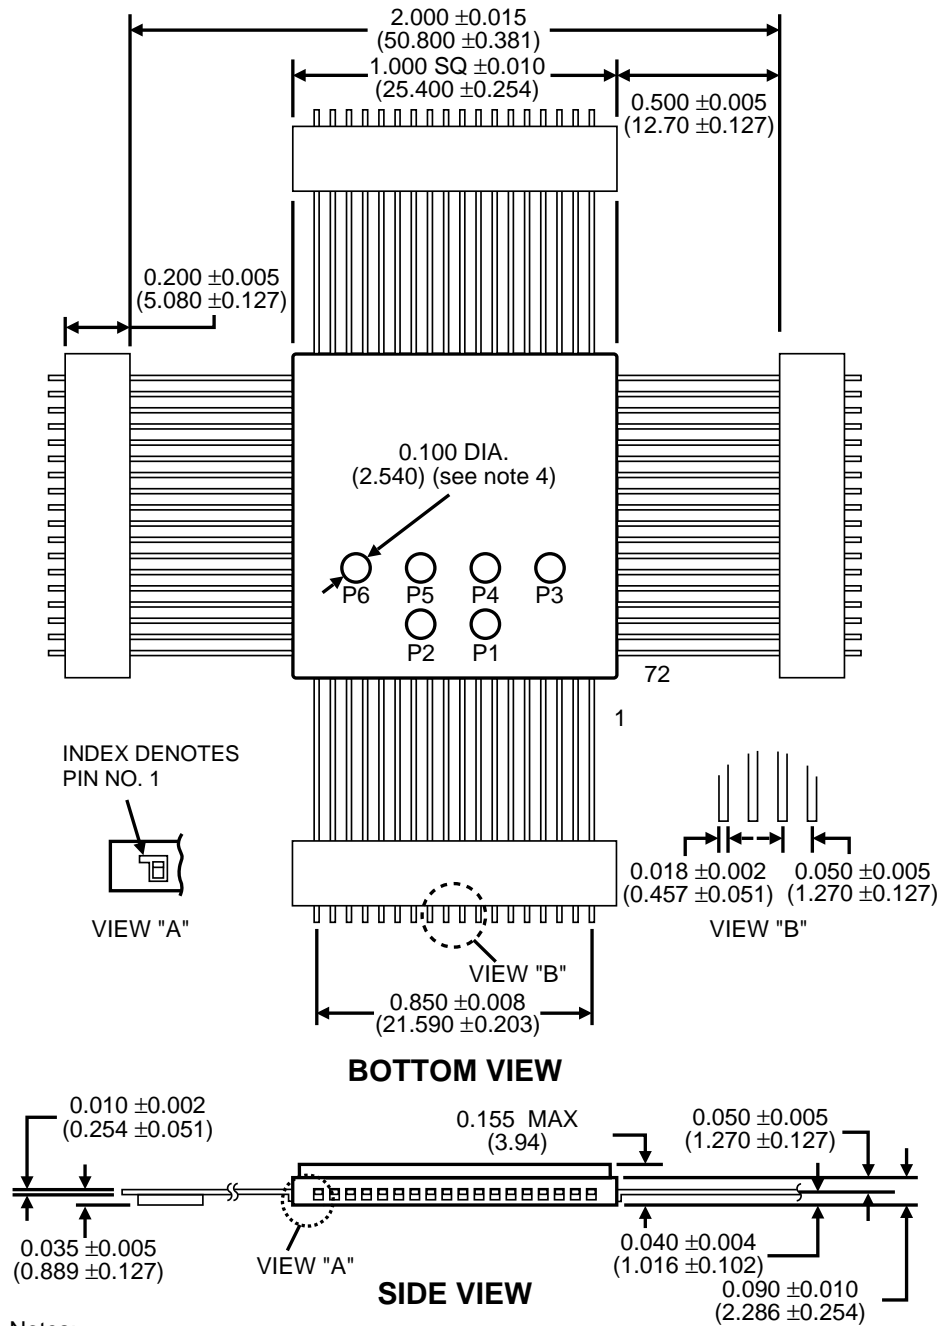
MECHANICAL OUTLINE DRAWING FOR 72-LEAD FLATPACK
